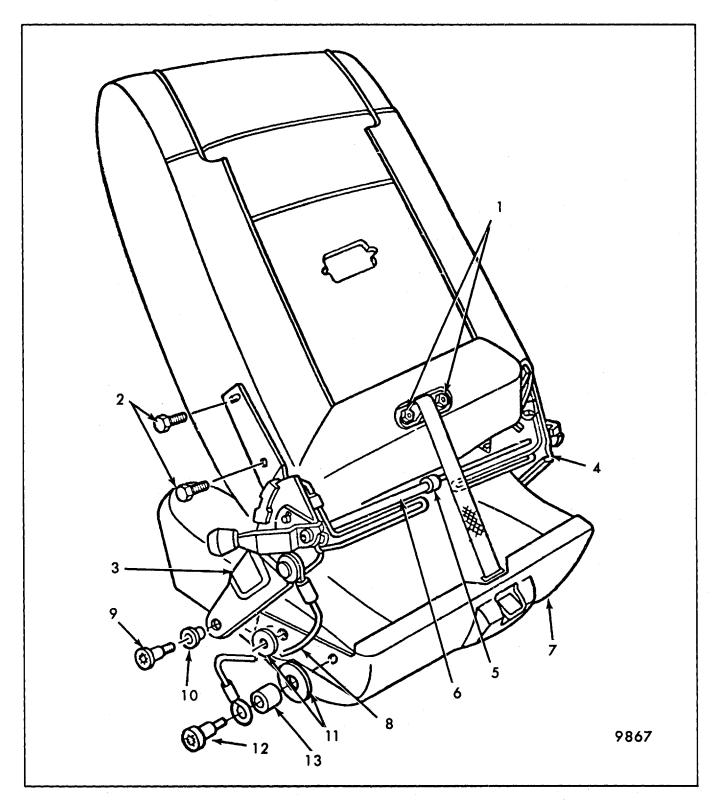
Bucket Seat Back Reclining Control Hinges - Passenger Seat Shown
